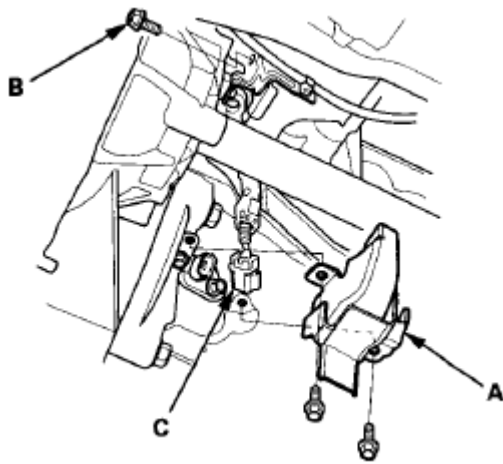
Identifying CKP Sensor Cover, Connector And Bolt
